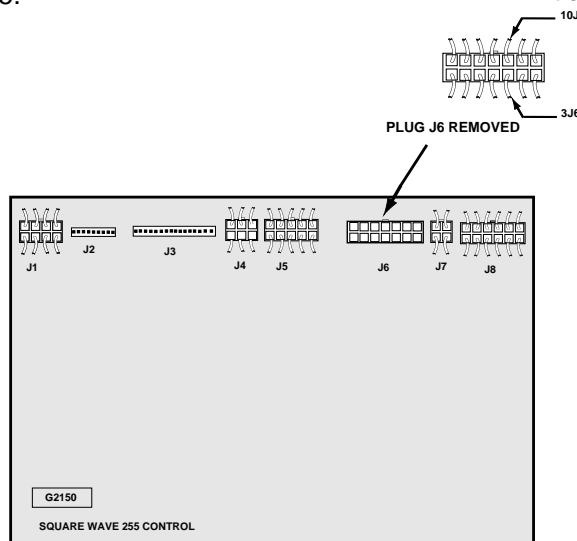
CONTROL BOARD TEST POINTS.
